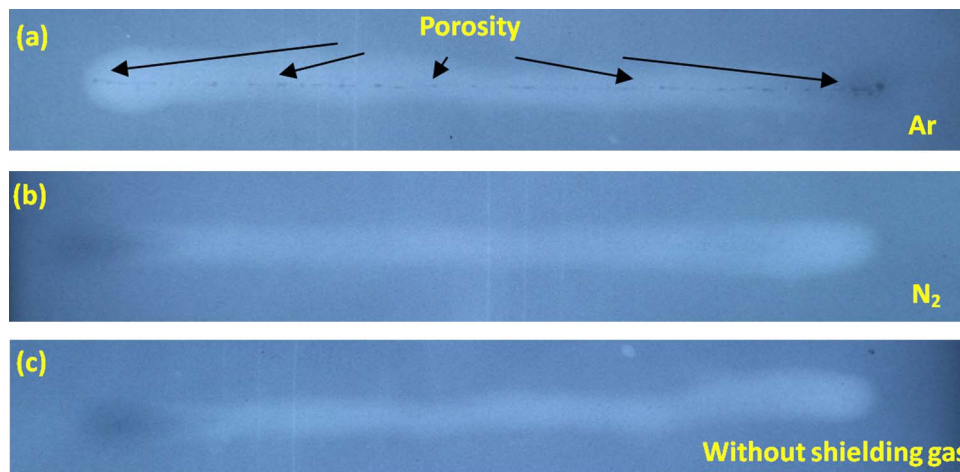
Radiographs of laser weld made in 304L stainless steel with a laser power of 10 kW, a welding speed of 0.8 m/min and different shielding gases of (a) Ar, (b) N₂ and (c) no gas.
